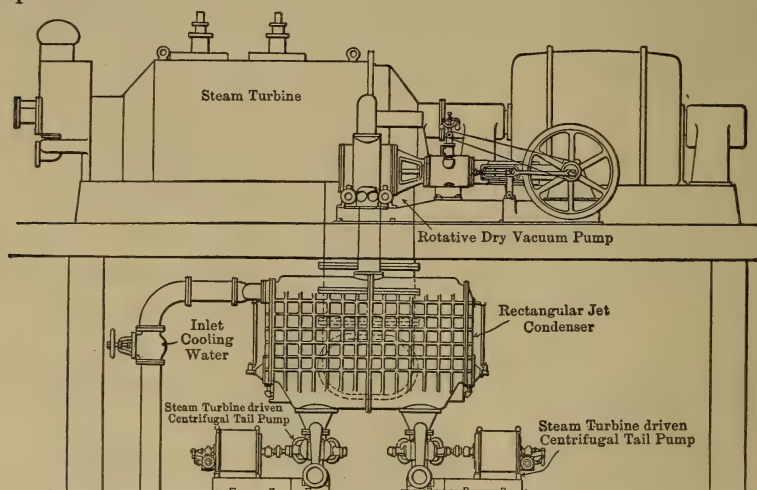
Wheeler Rectangular Jet Condenser with Centrifugal Tail Pump and Rotative Dry Vacuum Pump in Connection with a 10,000-kilowatt Steam Turbine.
